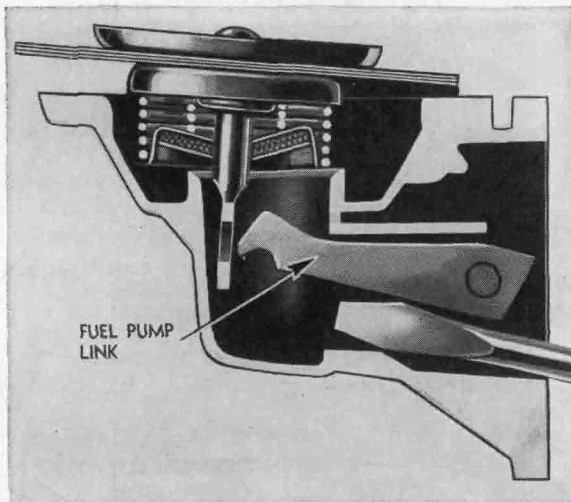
Hooking fuel-pump link to diaphragm stem with screw driver. (Chevrolet Motor Division of General Motors Corporation)
